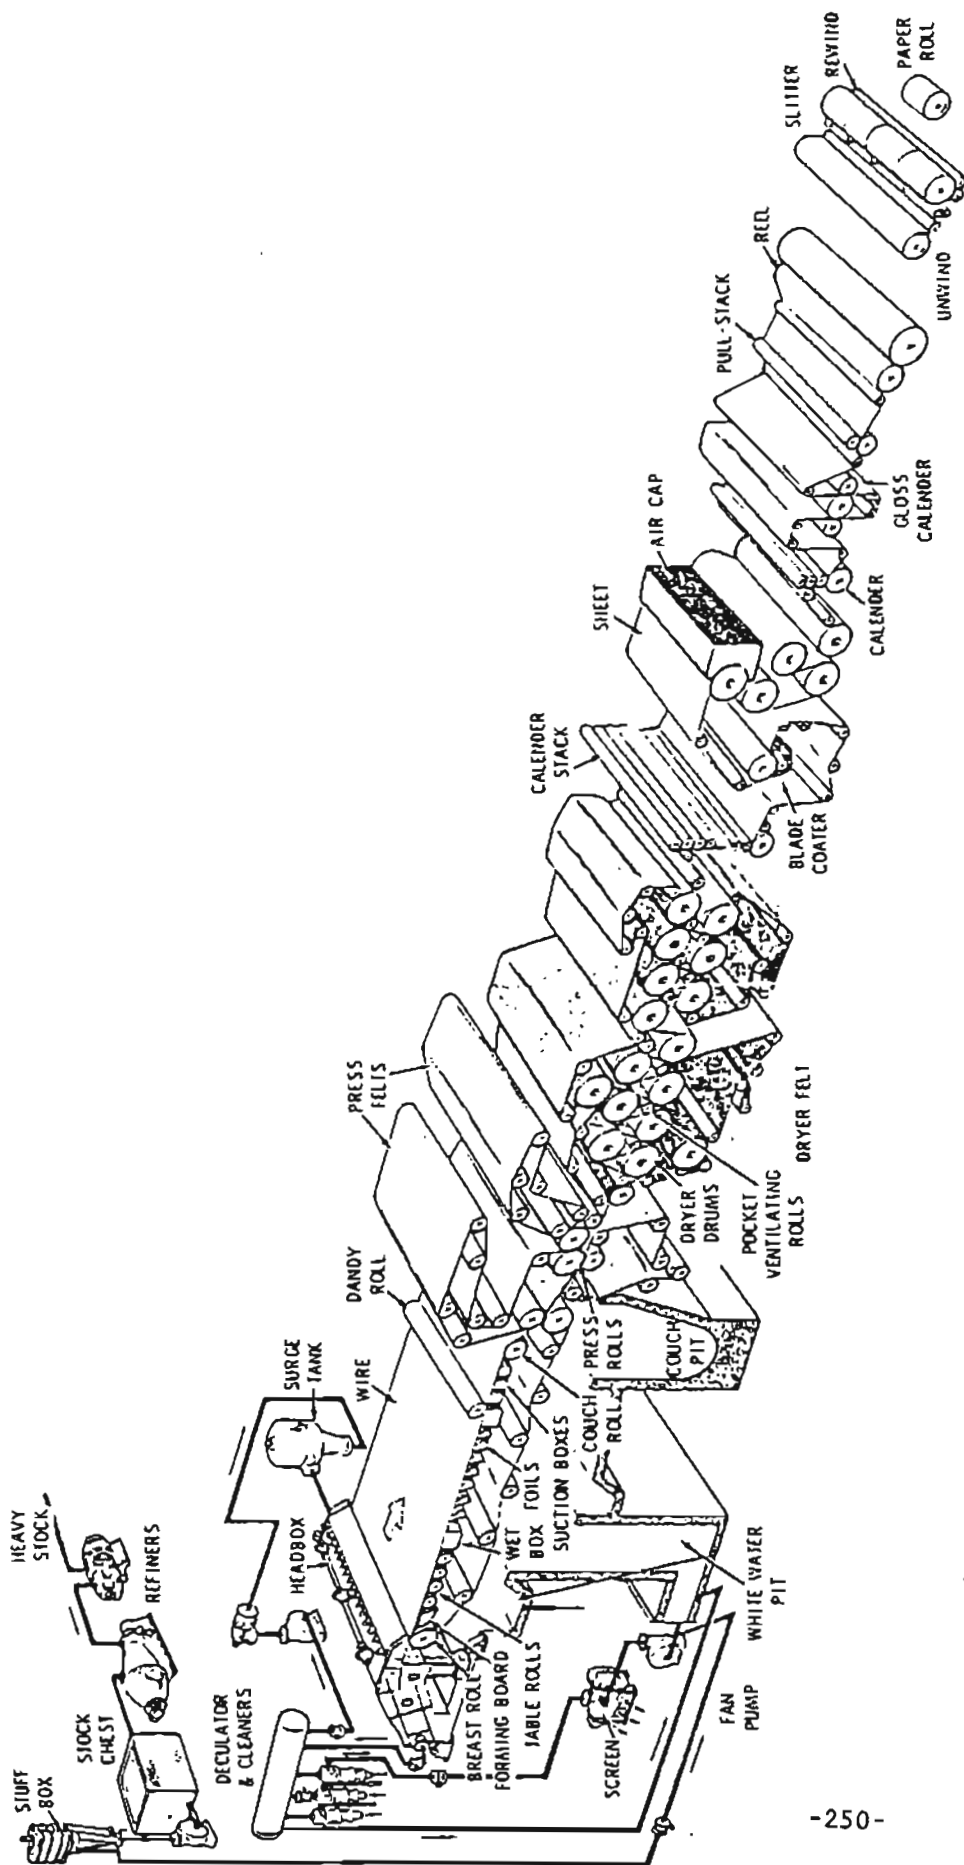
Fourdrinier machine for producing printing-grade paper. (Source: Beloit Corporation.)
